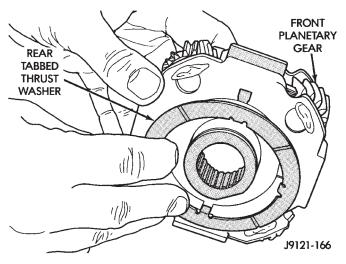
Installing Rear Thrust Washer On Front Planetary Gear
